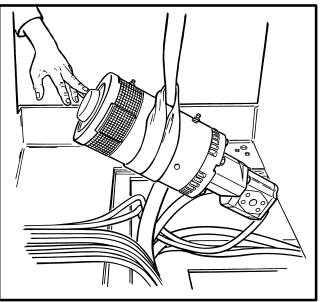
REMOVE THE HYDRAULIC PUMP AND MOTOR
